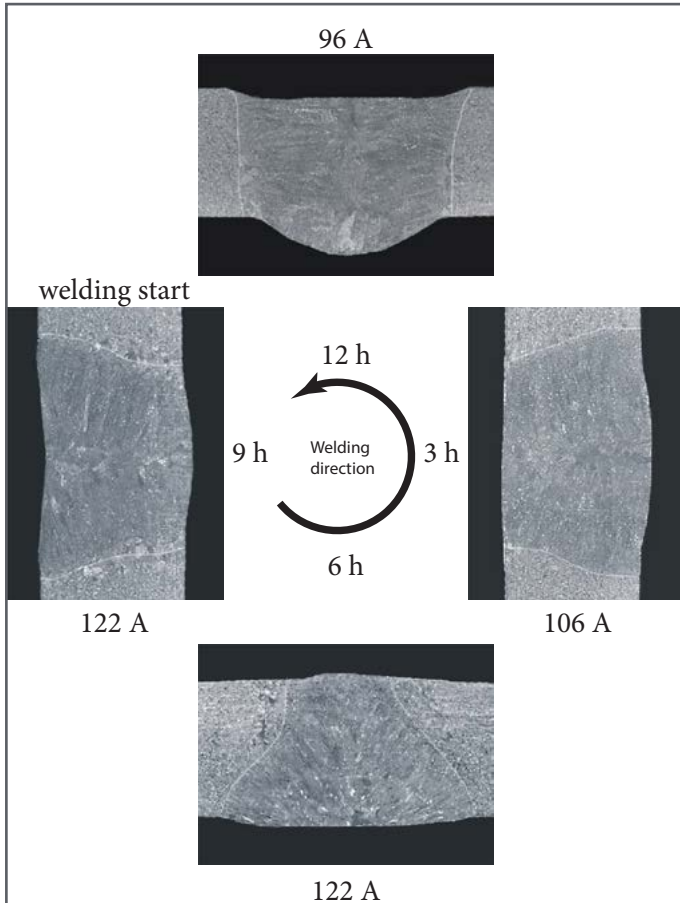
Macrostructure of orbital He-shielded TIG welded joint
